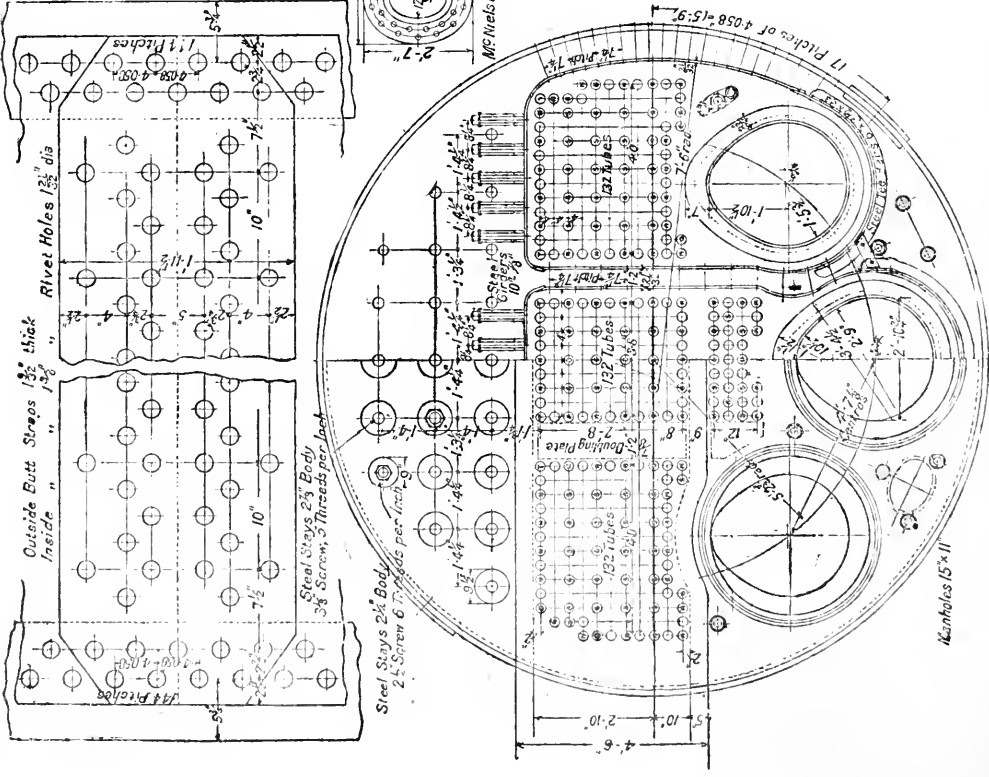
Three-Furnace Single-ended Boiler with Three Combustion Chambers.
